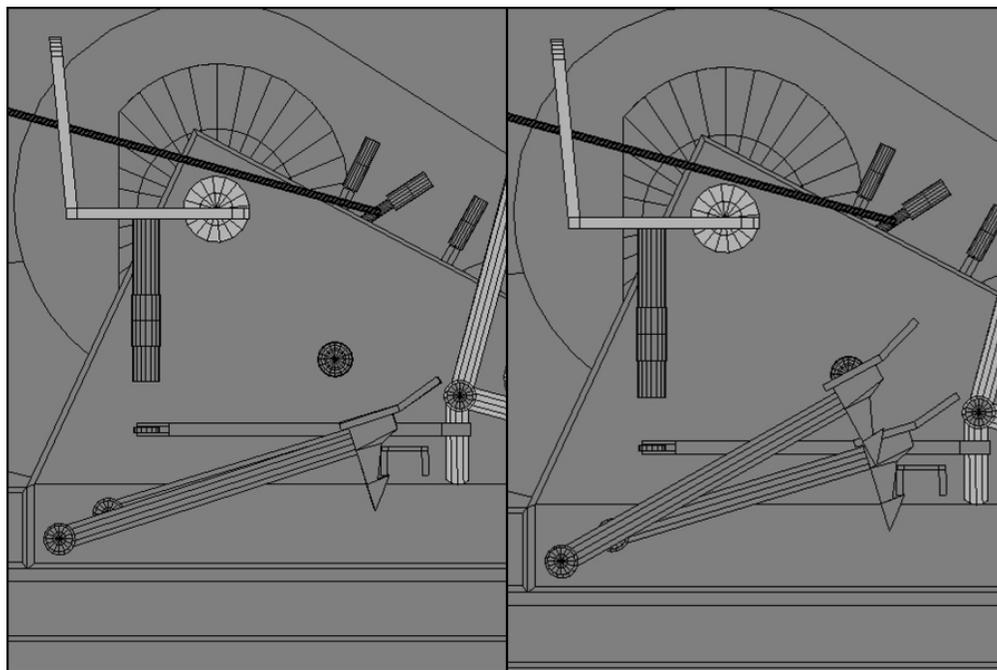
Operation of *Athena 106* foot brake pedals (shown at bottom of both illustrations). On the left, both pedals are engaged (depressed) and latched in place by the fixed steel piece shown pressing on a triangular section at the bottom of the pedals. On the right, the front pedal is released and the back pedal is still engaged. To release the pedal, the operator would push down on the pedal and twist the latch out of place, allowing a spring to raise the pedal. Objects in white are the operator's seat (upper left) next to a round bearing for the upper winch, and the hand friction control lever (lower right) that could be used to brake the winch if the foot pedals disengaged.
